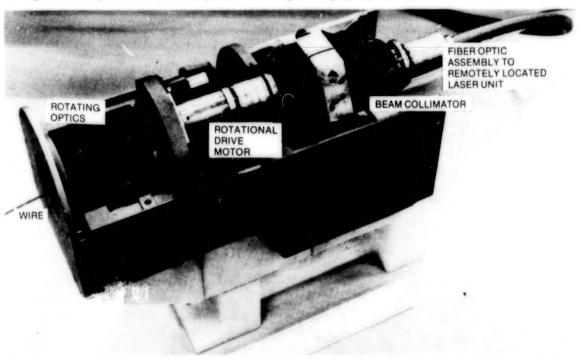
Hand-held laser wire stripper modified for use with a flexible fiber-optic cable that brings in 1.06-μm radiation from a remote Nd:YAG laser.
